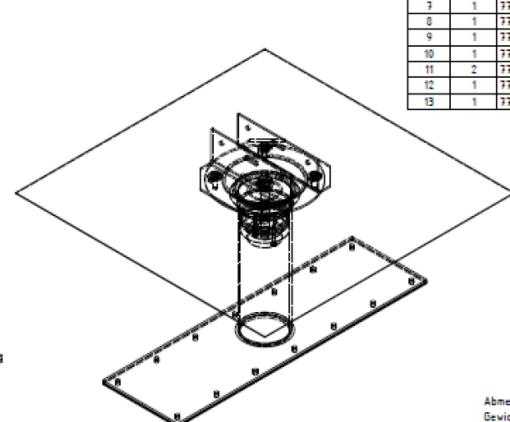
V2: Point fastening kit for roof panels, corrugated metal sheets.
